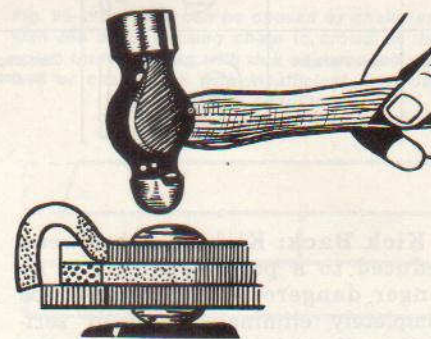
Rivets can be installed using a ball peen if carefully done.
